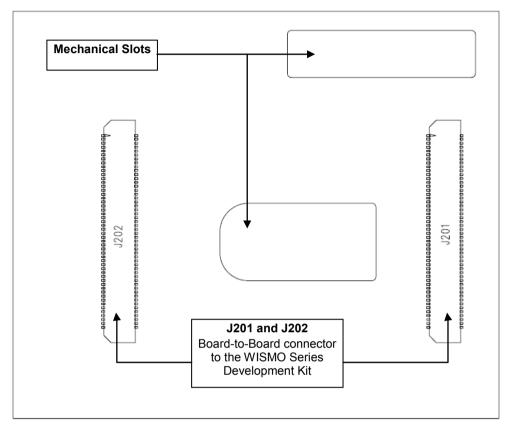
WISMO Series Socket-Up Board (Bottom View)
